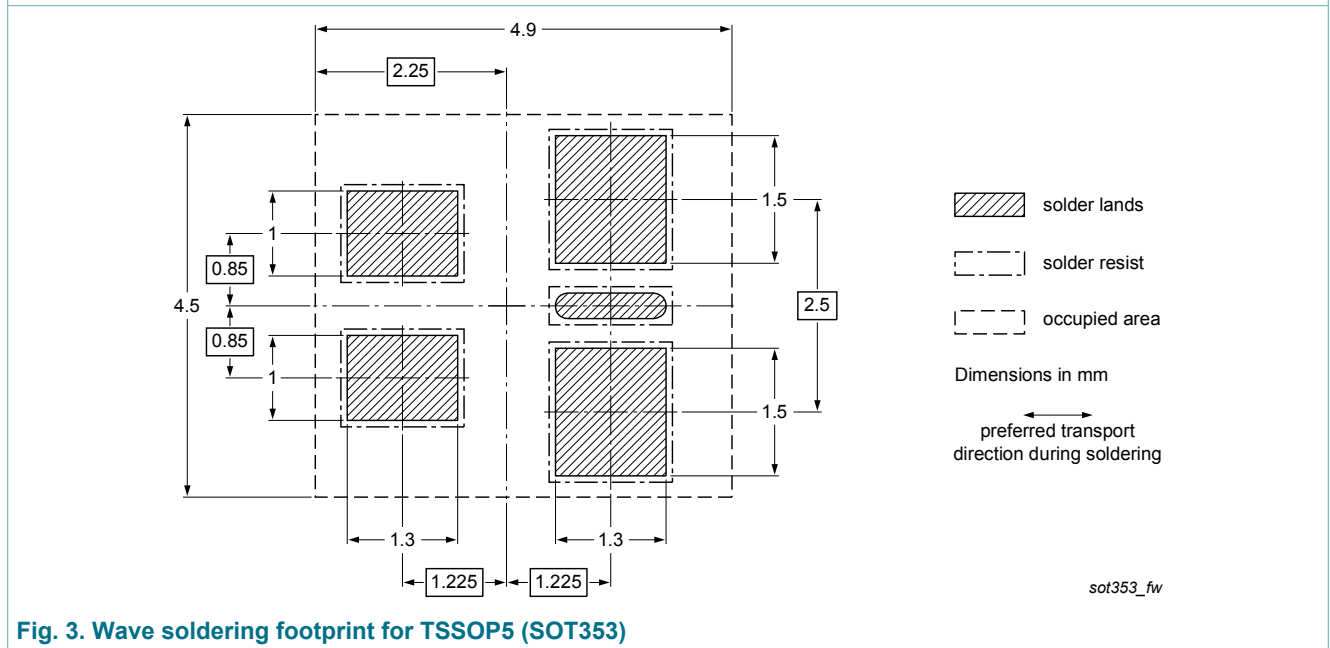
Wave soldering footprint for TSSOP5 (SOT353)
